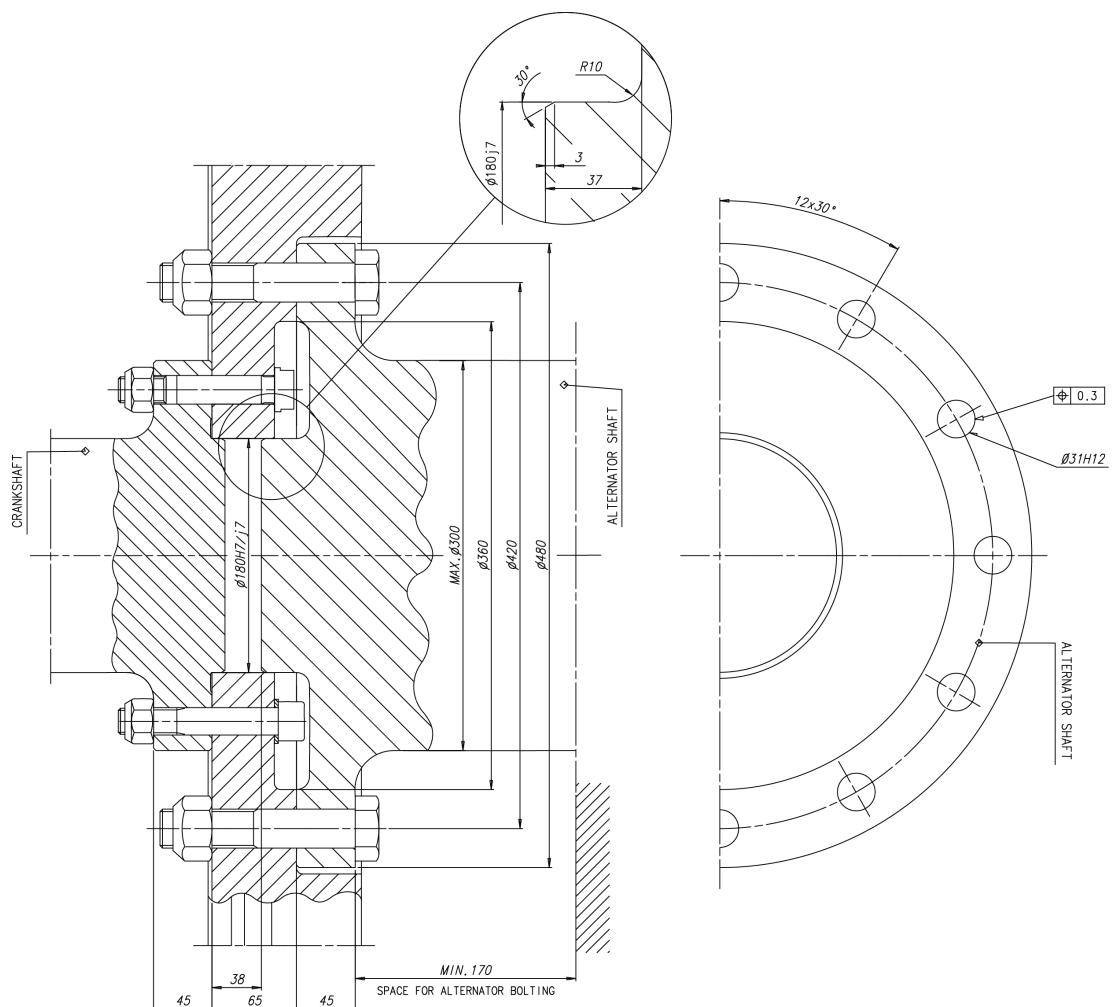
Connection engine/single bearing generator (2V64L0071B)
